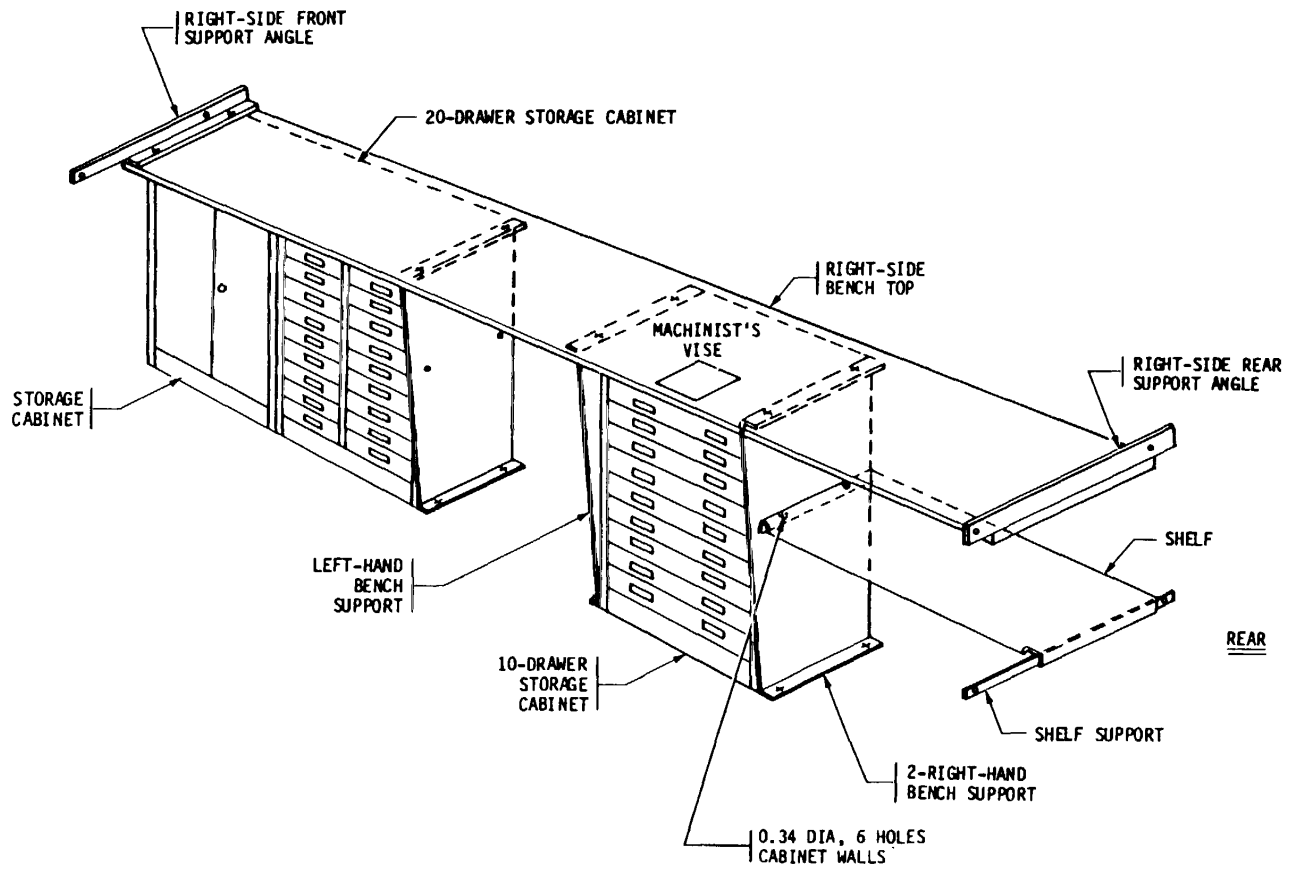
Storage Cabinet Installation Right Side, Components to be Mounted, Unit 1, 280.
